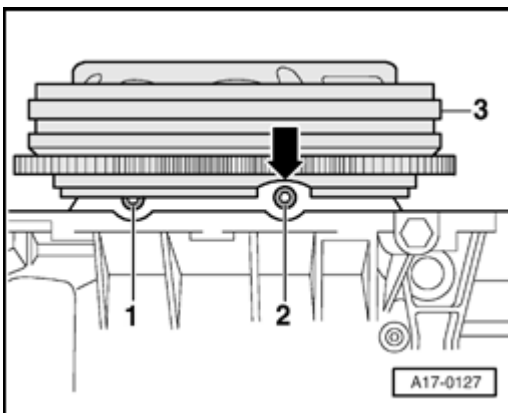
Identifying Rear Oil Pan Bolts & Turning Flywheel
